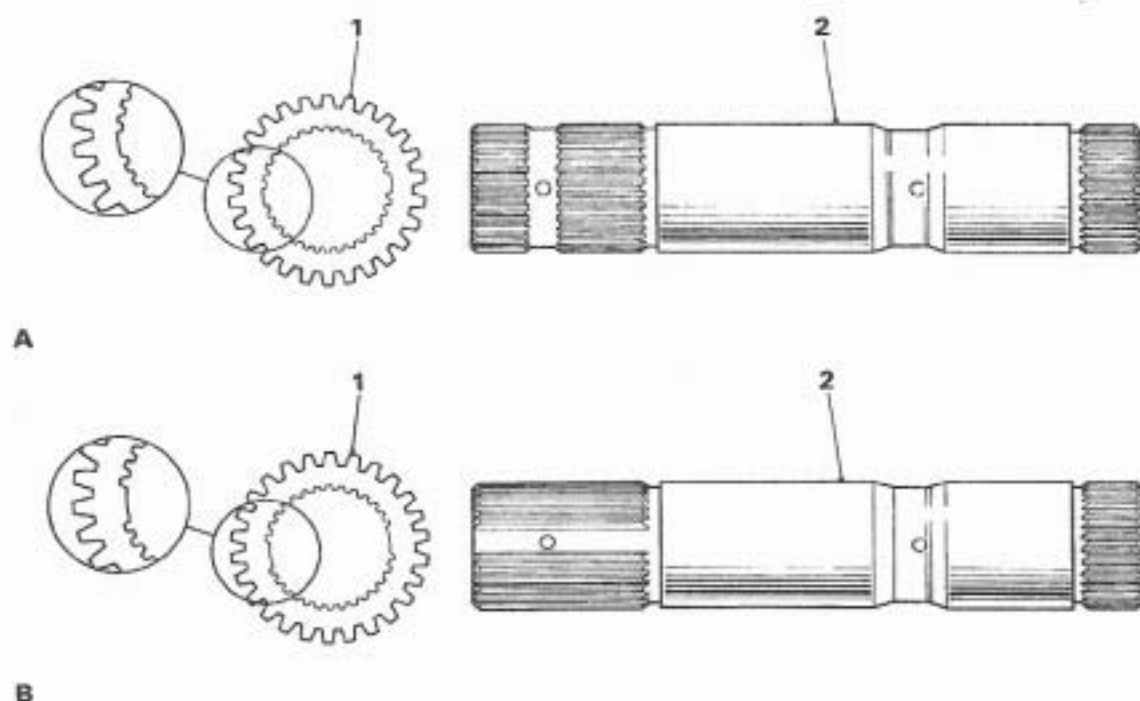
IDENTIFICATION OF SUN GEAR AND SHAFT
